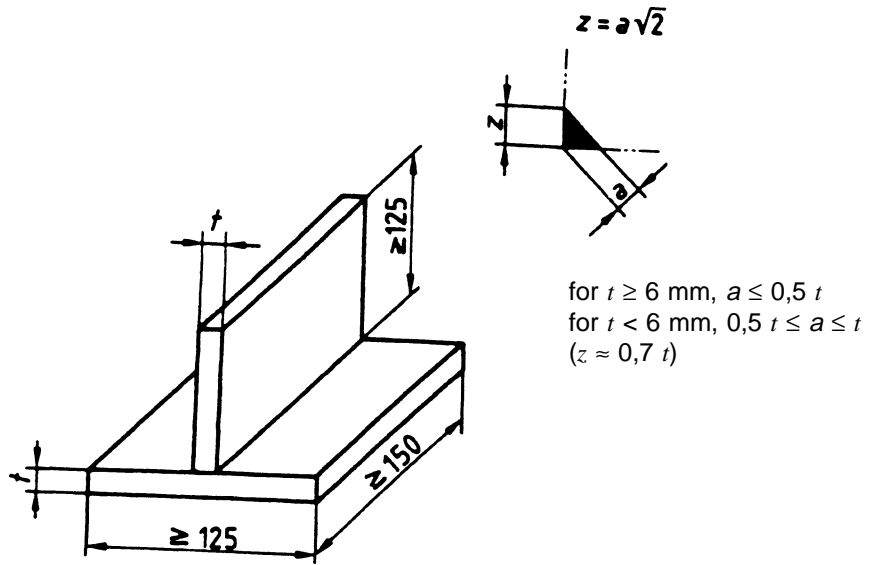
Dimensions of test piece for fillet weld(s) on plate
